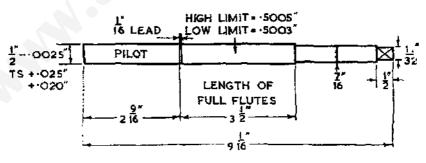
DIMENSIONS OF PILOT REAMER USED IN REFITTING CAMSHAFT BUSHES.
